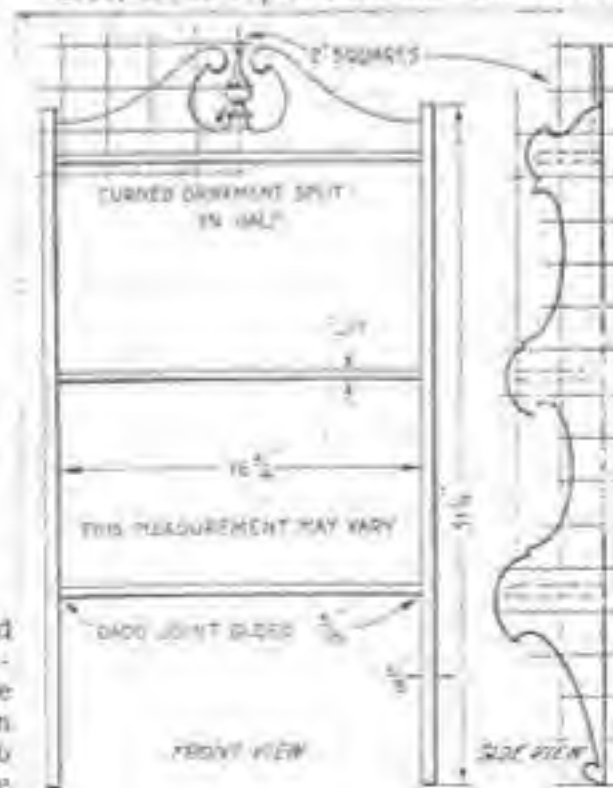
Detailed drawing of the shelves with the curved outlines which are to be cut out by the jig saw and to 2 in. squares.
